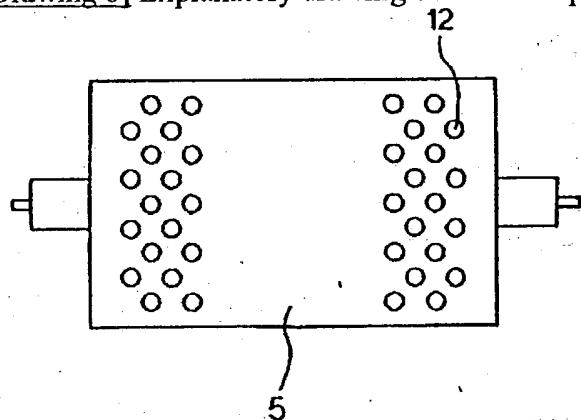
Explanatory drawing of the example which cools a roll with a volume by the cooled nozzle.
